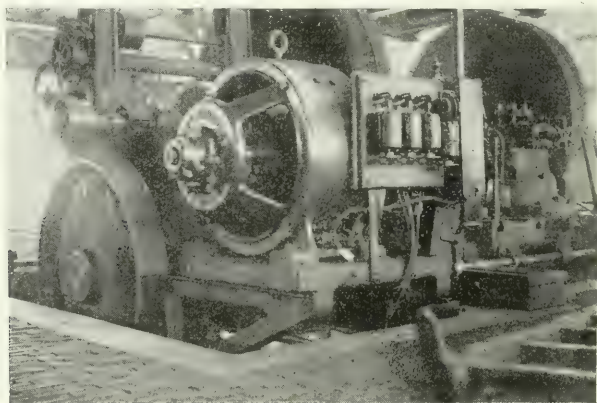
FIFTY HORSE-POWER MOTOR AND CONTROL EQUIPMENT FOR DRIVING-WHEEL LATHE
